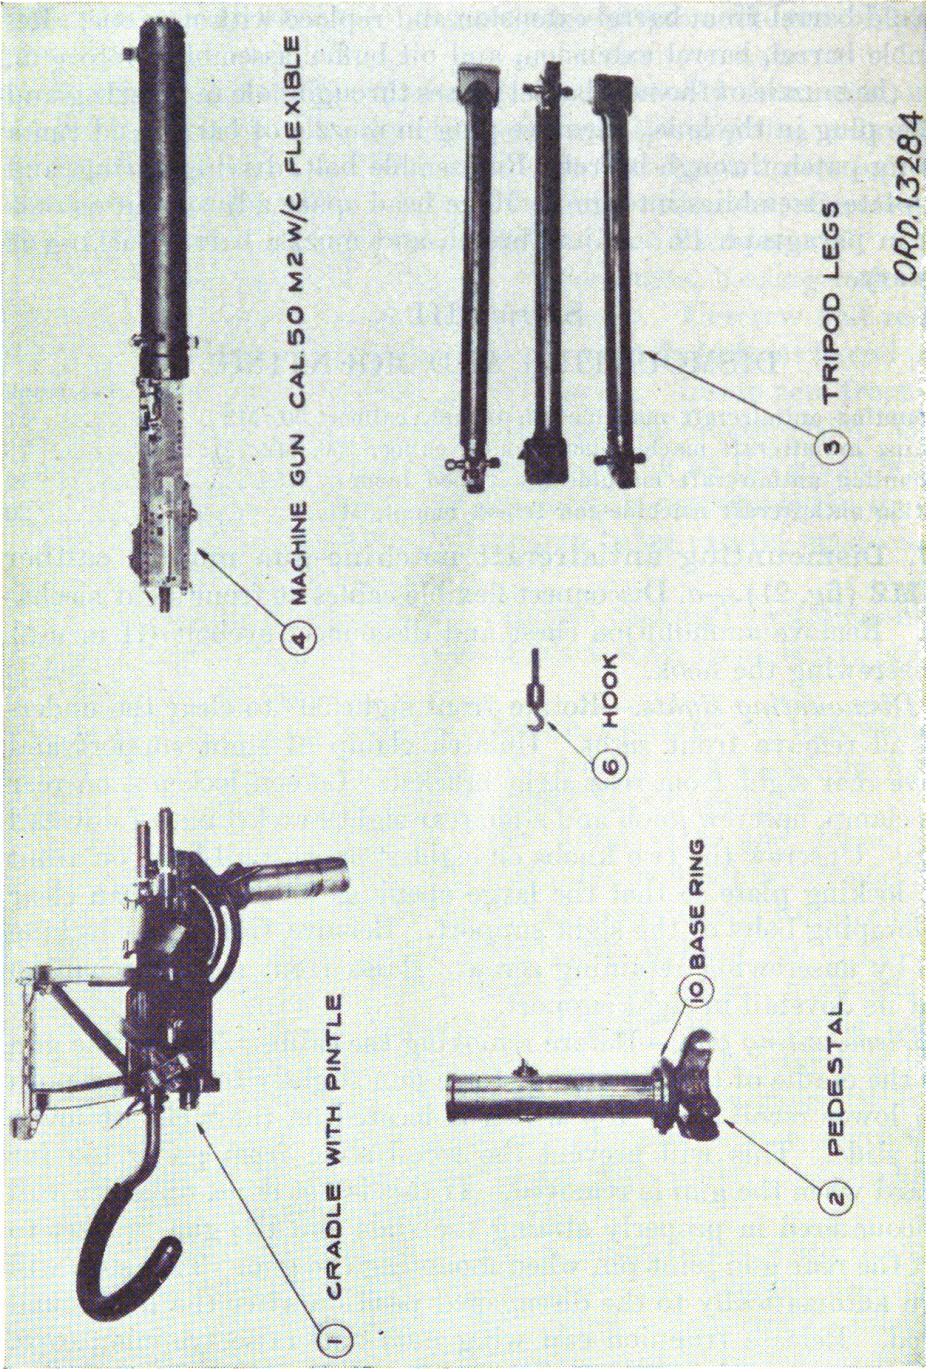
Anti-aircraft machine-gun mount, caliber .50, M2, components and machine gun.
